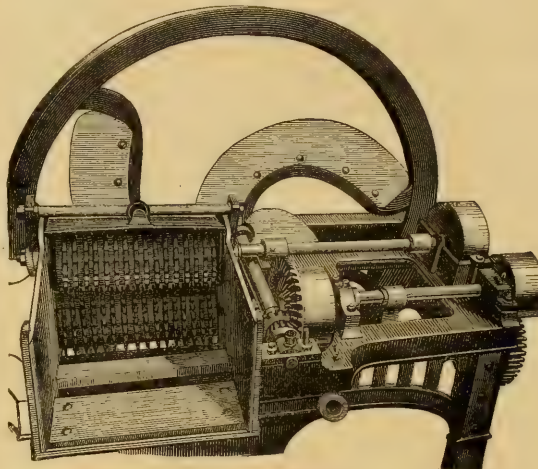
VIEW OF MESSRS. RICHMOND AND CHANDLER'S CHAFF-CUTTER, SHOWING GEARING.
